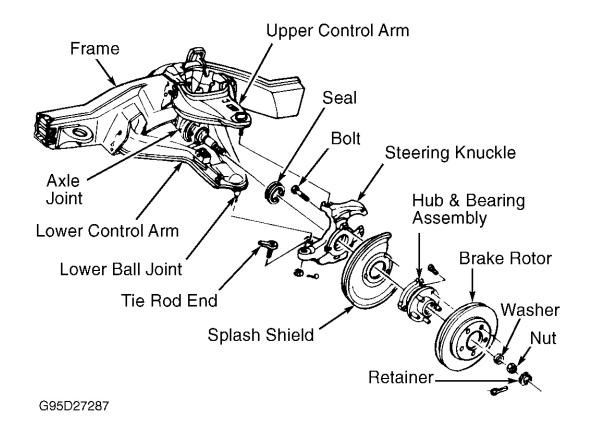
Exploded View Of Hub & Steering Knuckle Assembly Courtesy of GENERAL MOTORS CORP.
